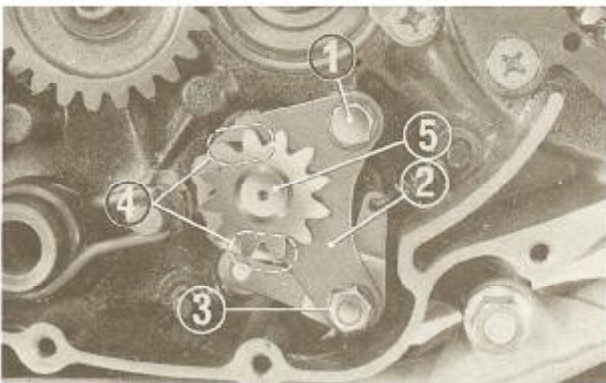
(1) Bolt (4) Ratchet pawl
